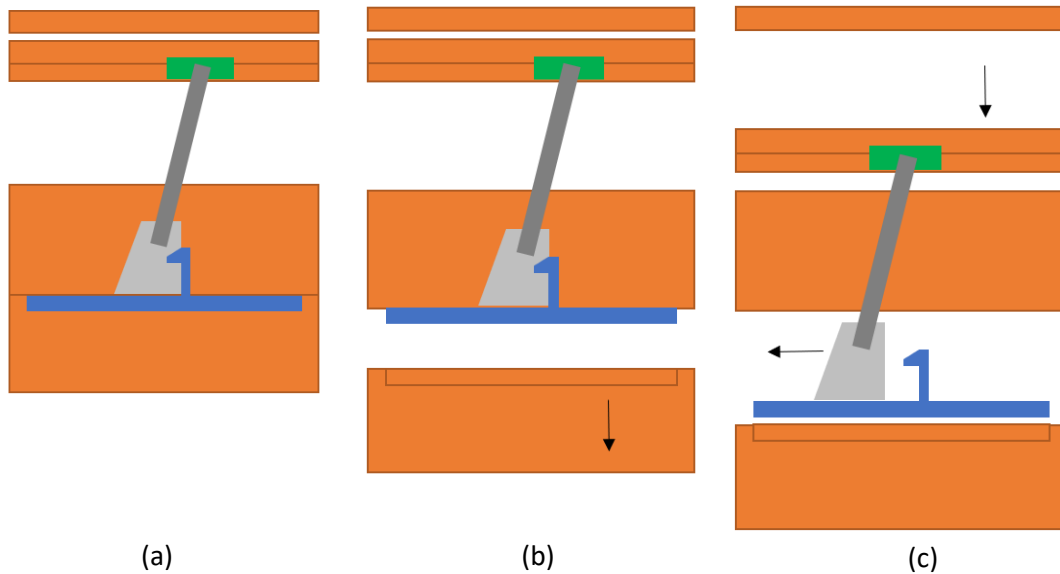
Angle ejector movement illustration a) Injection step b) mould opening c) extraction.
